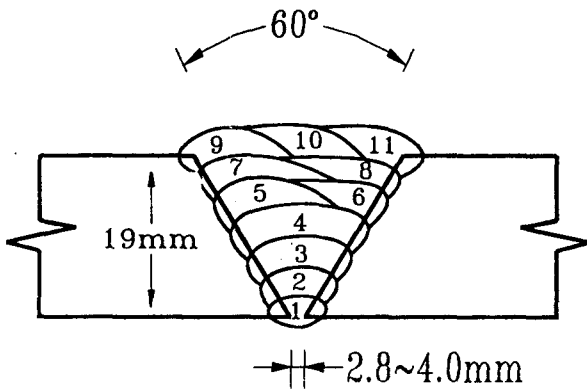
Schematic diagram of specimen and welding procedure
